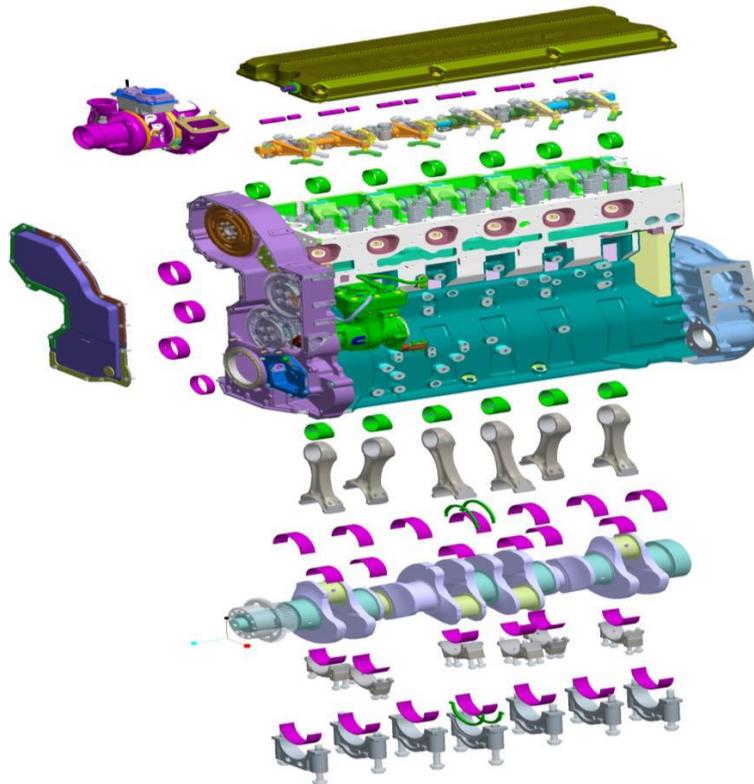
Parts of a typical internal combustion engine with bearings and bushes shown in pink in this example
